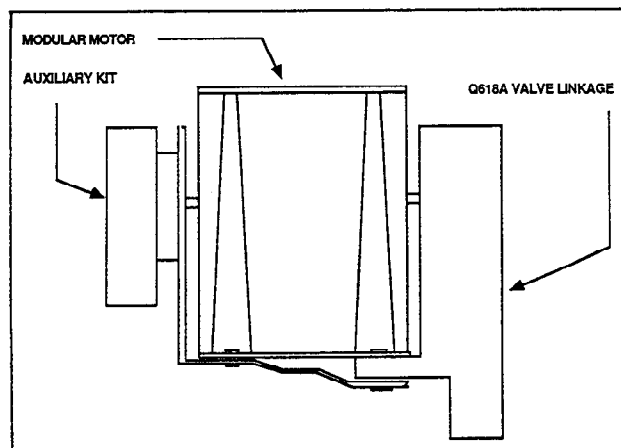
INSTALLATION OF MODULAR MOTOR AND AUXILIARY KITS ON HONEYWELL Q618A VALVE LINKAGE
